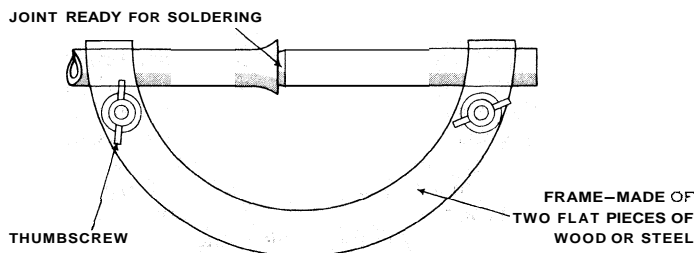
METHOD OF HOLDING PIPES IN POSITION FOR MAKING A JOINT
